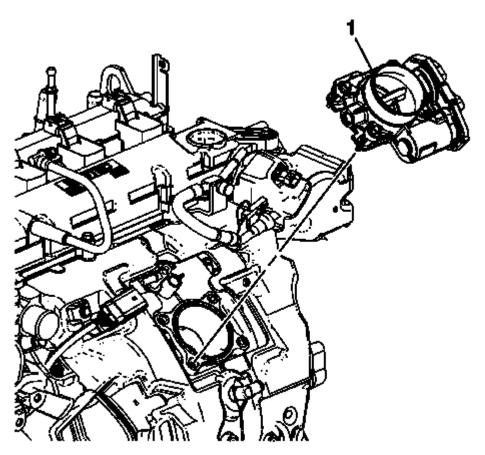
Throttle Body Courtesy of GENERAL MOTORS COMPANY
